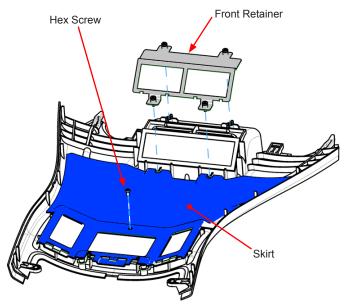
Lower Front Panel - Front Retainer and Skirt Removal
